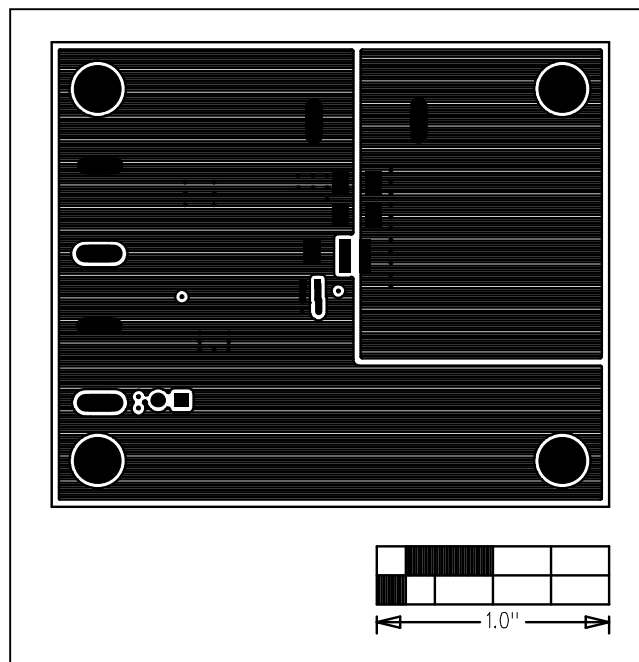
MAXM17514 EV Kit PCB Layout—Solder Side
